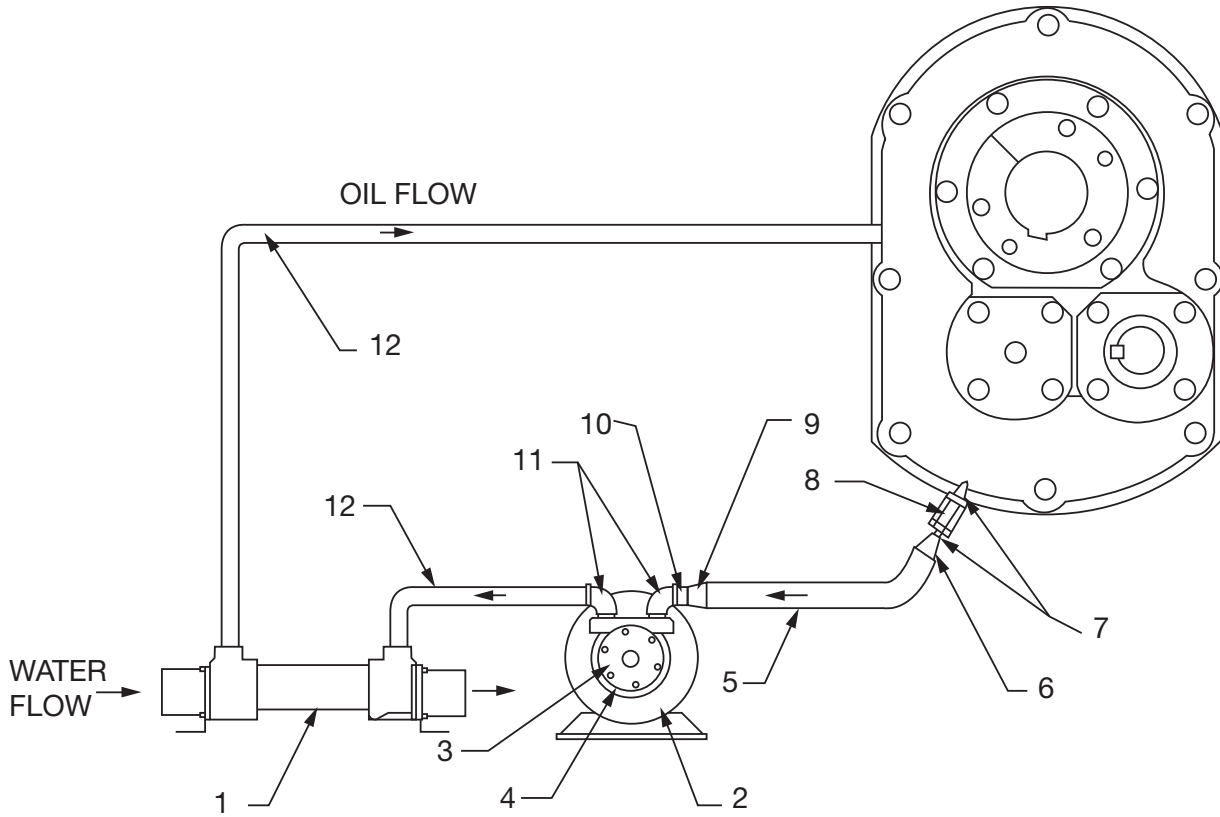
Cooling System for Torque-Arm Shaft Mounted Speed Reducer
